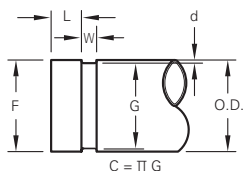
Roll Grooved-End Dimensional Reference Points for Table 1
